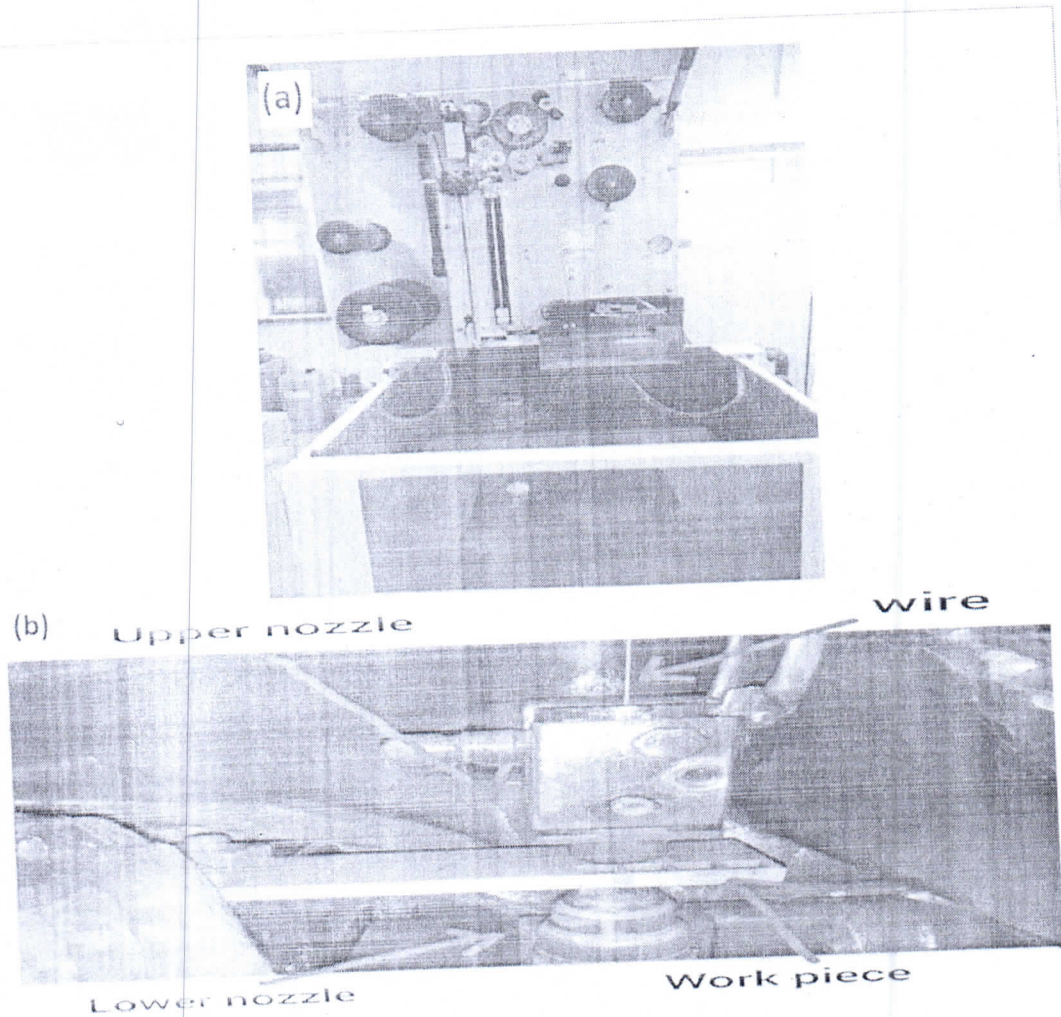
(a) Sprint cut electronics wire EDM machine, and (b) the workpiece is cut with coated wire.
